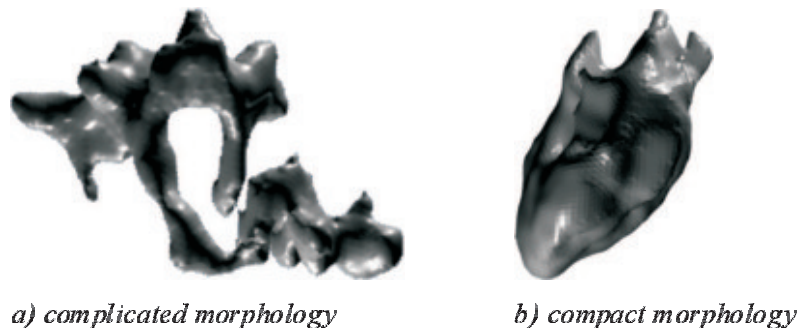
3D models of casting defects identified by the X-ray tomography
